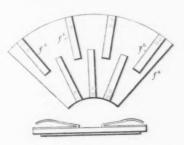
Detail View of One of the Metallic Valve Plates.
